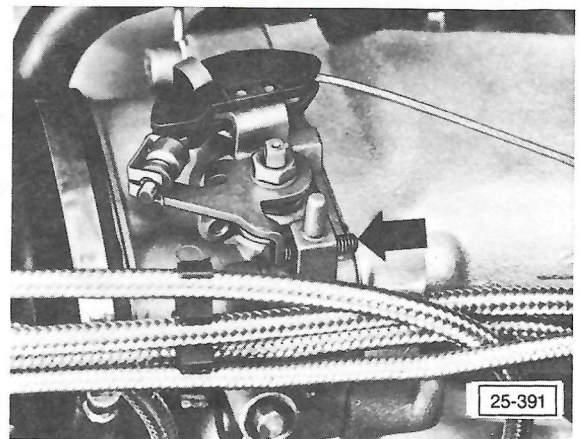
Typical location (arrow) of throttle-valve adjusting screw.
